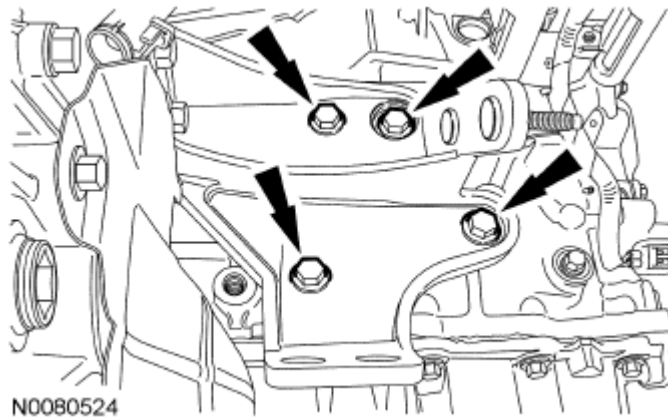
Locating PTU Bracket-To-Engine Bolts
